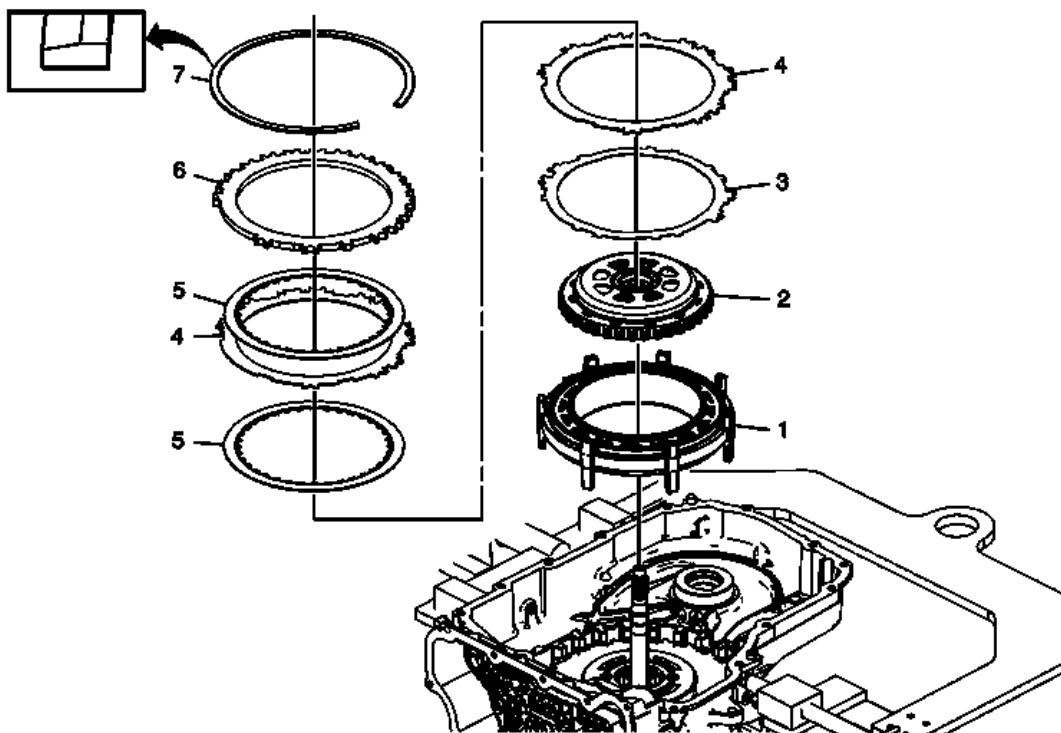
View Of Low and Reverse & 1-2-3-4 Clutch Housing & Attached Components
